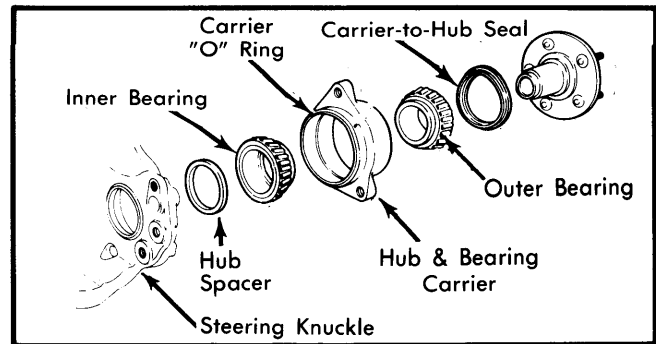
Exploded View of Eagle Axle Hub Assembly
